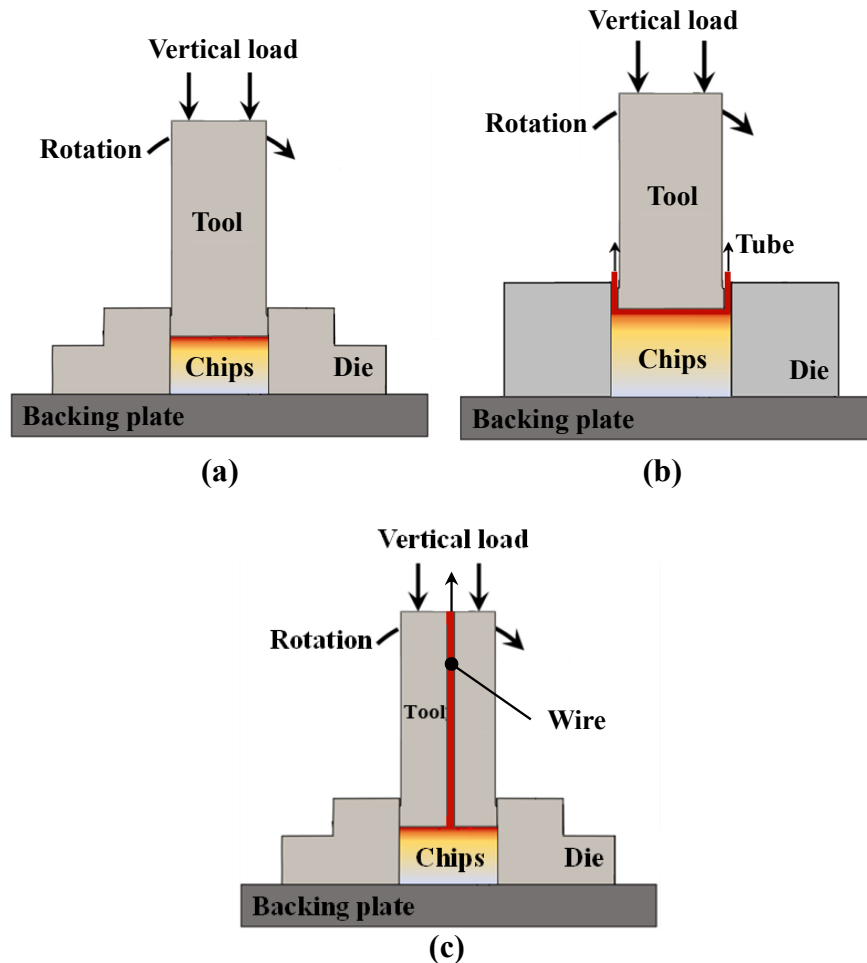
Schematic setup for (a) FSC, (b) FSE of tube, and (c) FSE of wire.
